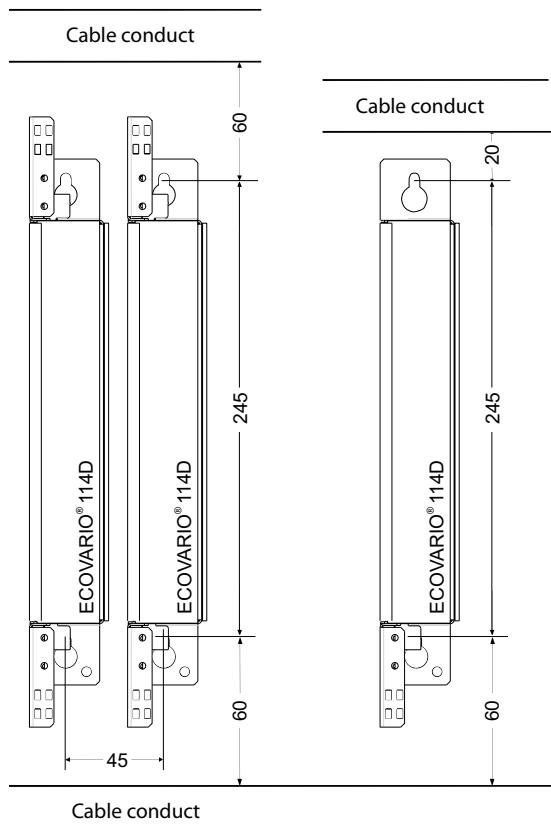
Mounting dimensions cabinet, width [mm]
